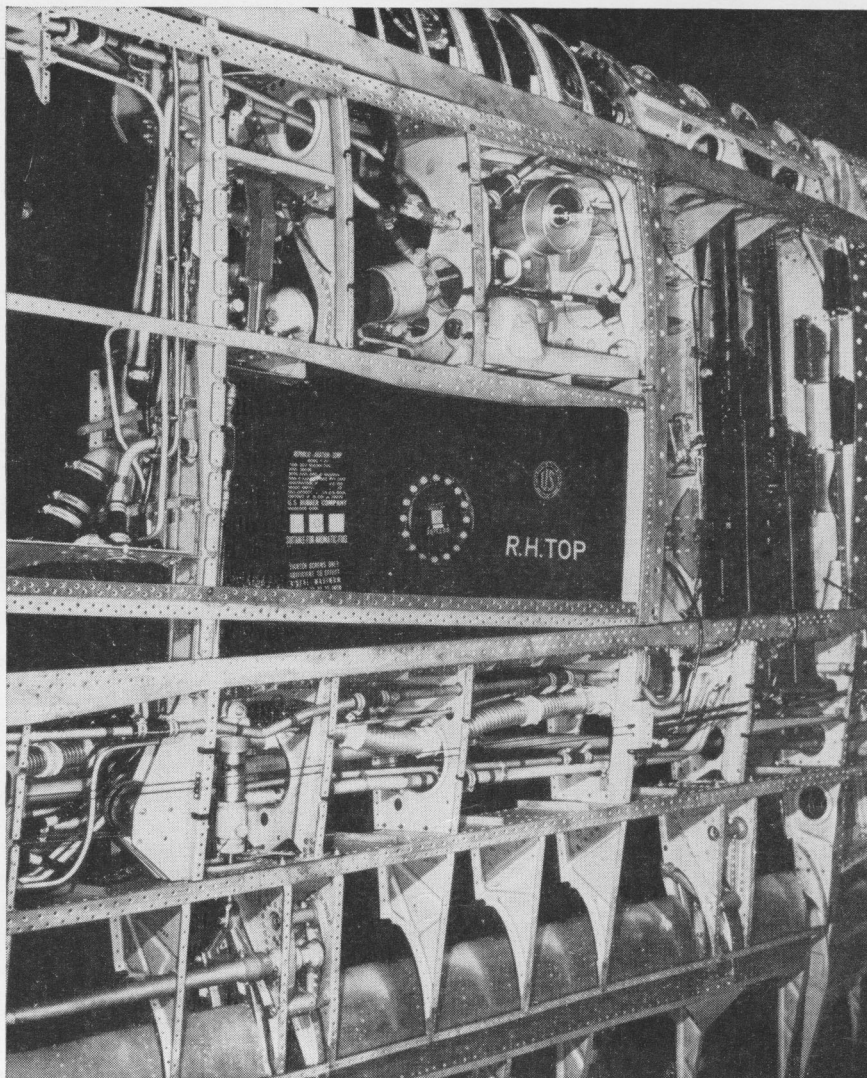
Detail of P-47N wing seen from aft of the T.E., showing the false spar and rib structure around the flap-actuating bell crank. Quickly removable inspection panels are seen on either side.
